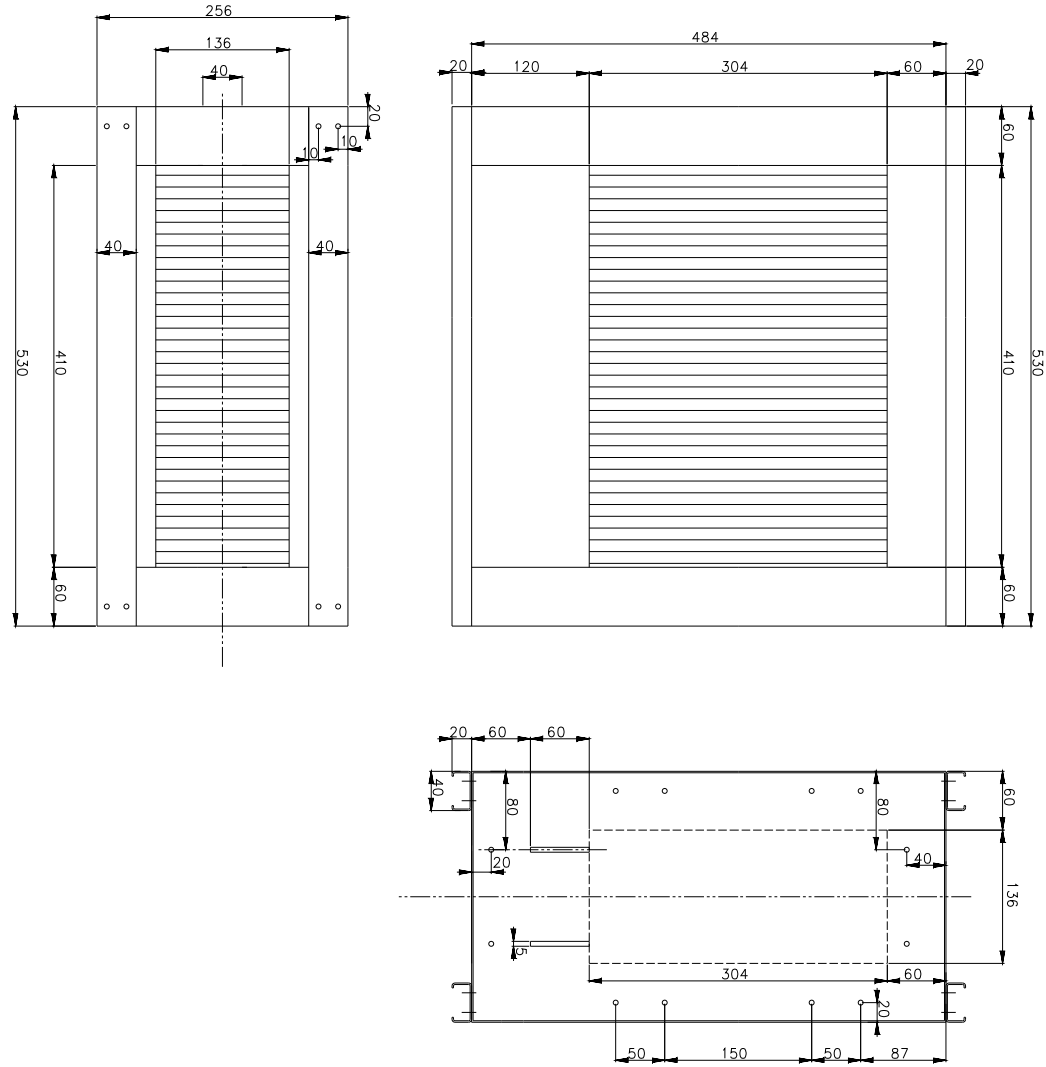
Construction and dimensions of the copper-aluminium prototype
